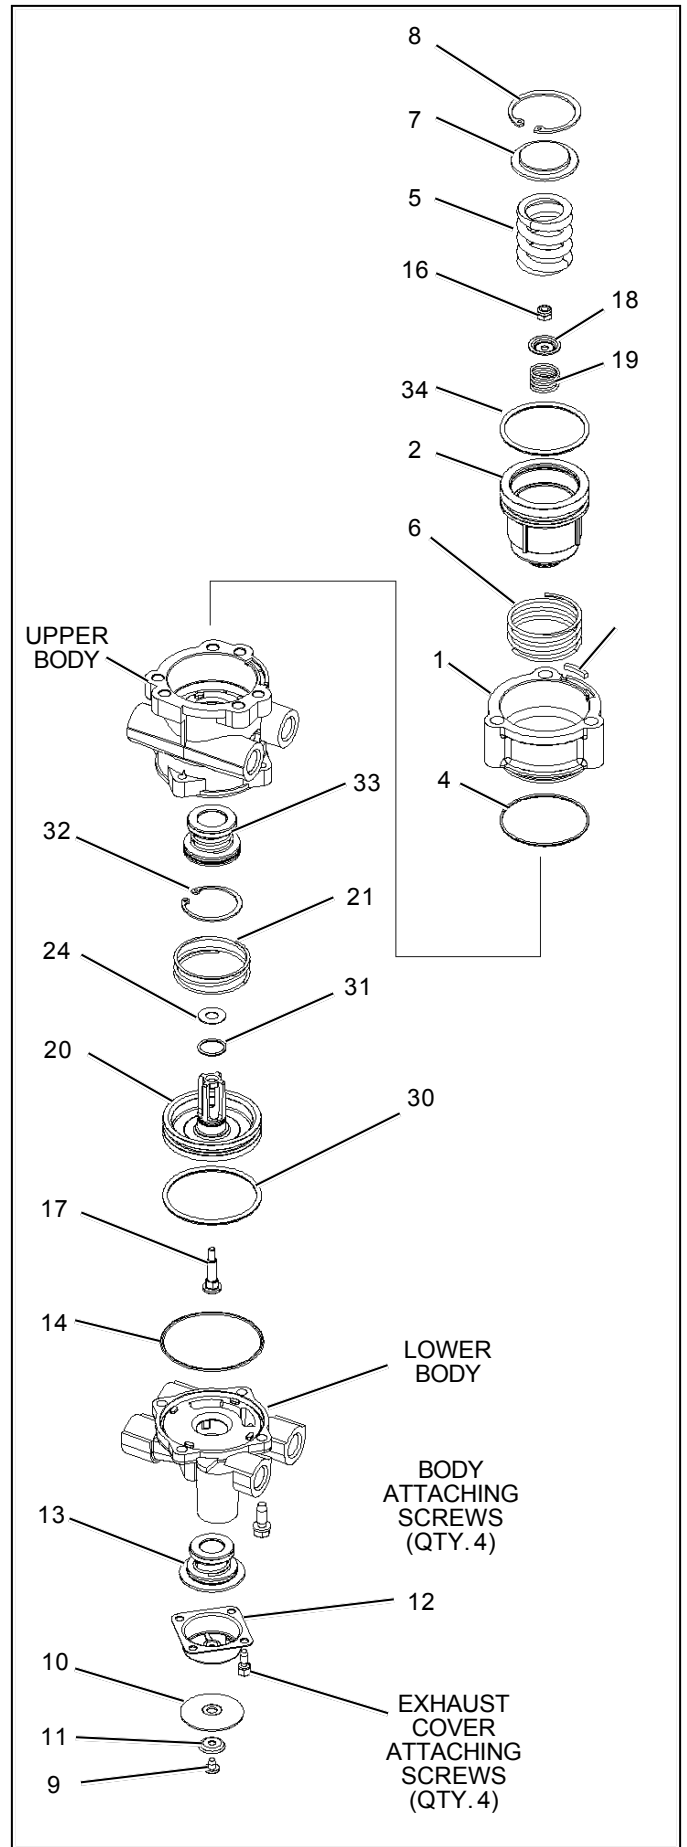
E-10P BRAKE VALVE - EXPLODED VIEW
